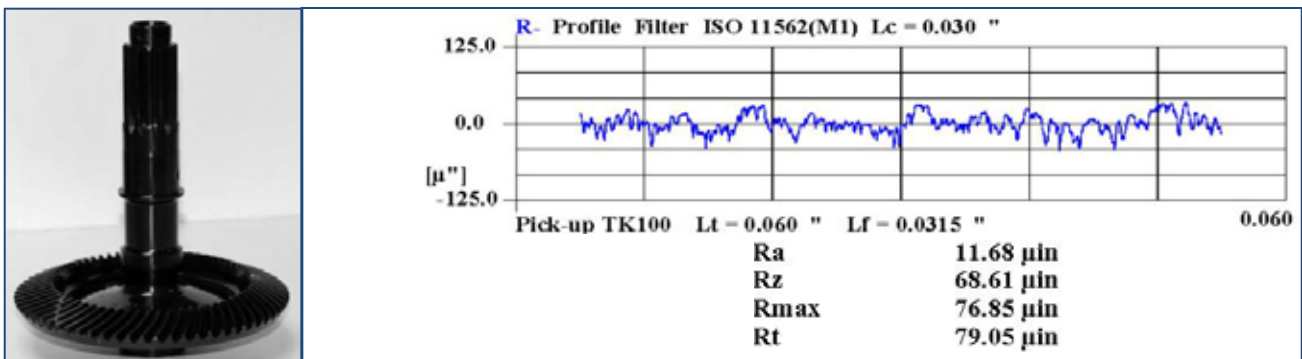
START CONDITION, Image and gear tooth surface roughness measurement of black oxide coated output gear 7-311320092 SN 00286-5389.
